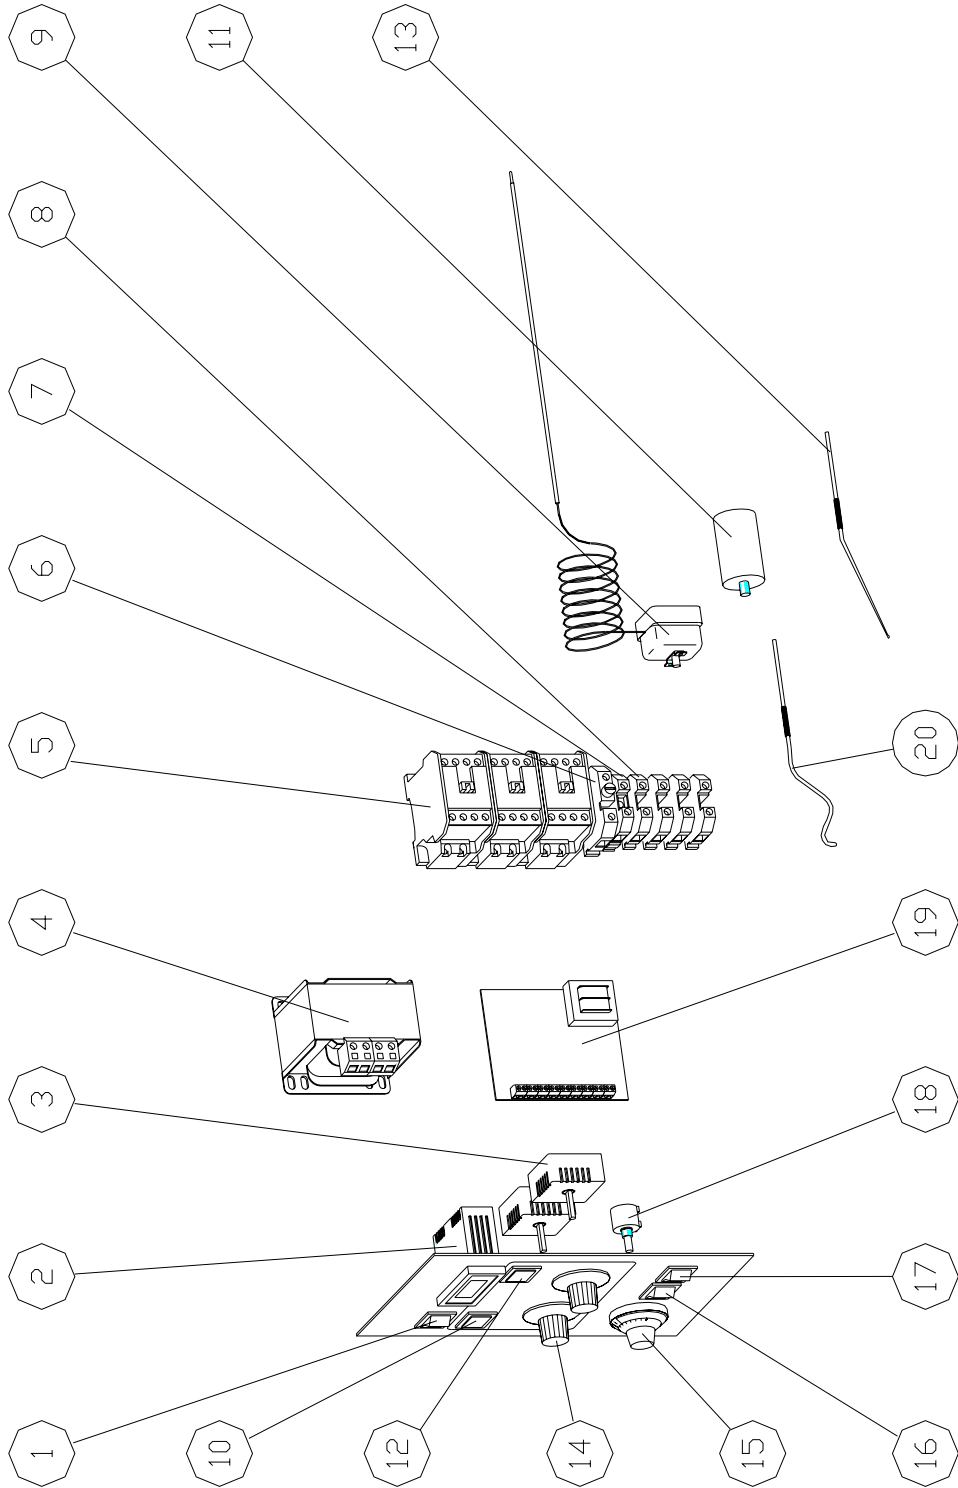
Exploded view of electrical parts; electromechanical version Synthesis 8/50V Power
